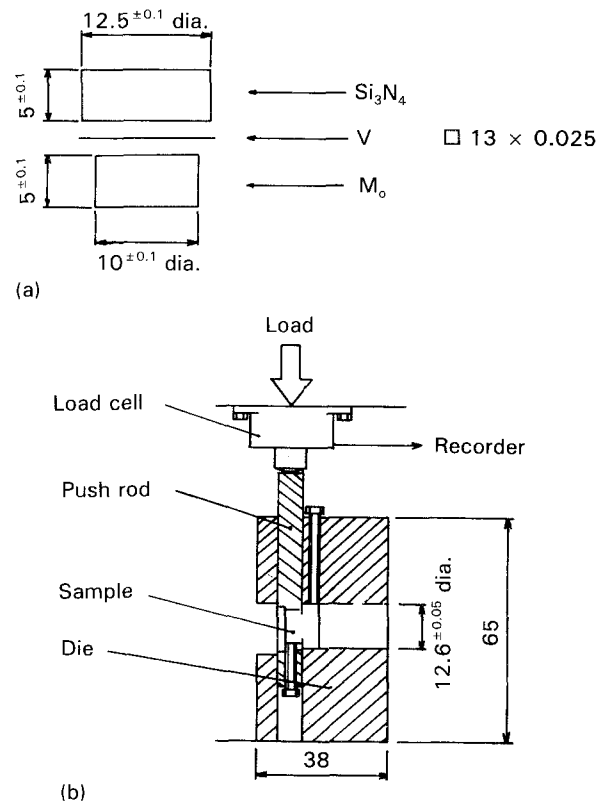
Schematic drawing of (a) the sample and (b) the jig.
